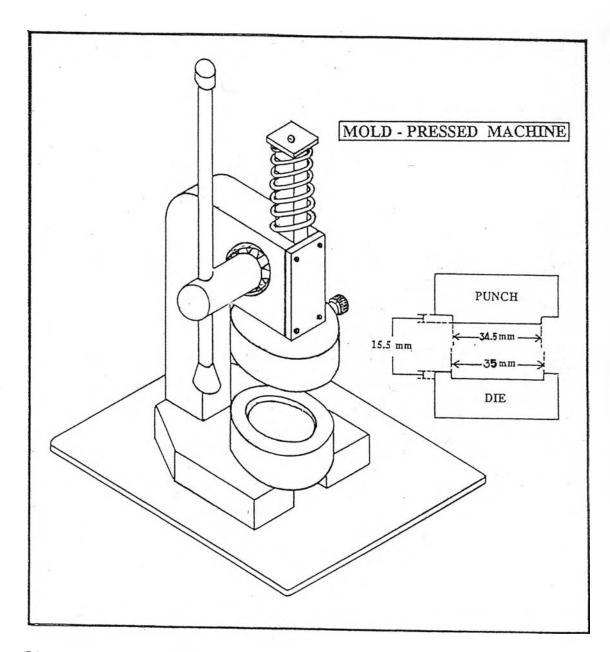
Schematic Illustration of Mold-Pressed Machine.
